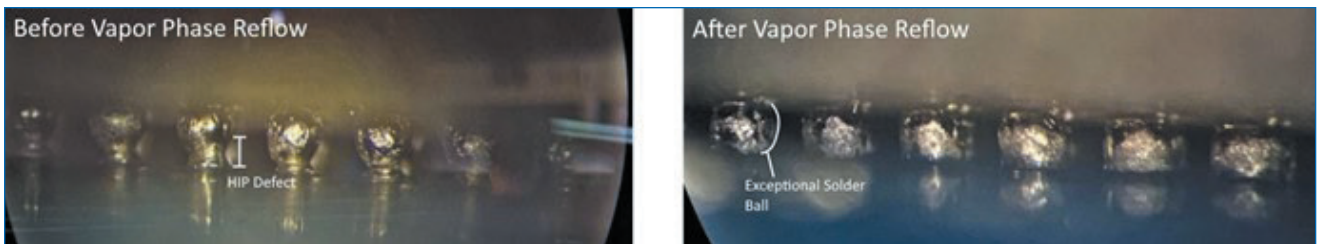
Two images of solder joints of a BGA/LGA hybrid connector. The left image is after the convection oven reflow with HiP defects. The right image is after the vapor phase rework. Inspection of the solder balls revealed elongated solder joints and HiP defects. After the rework, the solder joint formed an exceptional solder ball.
